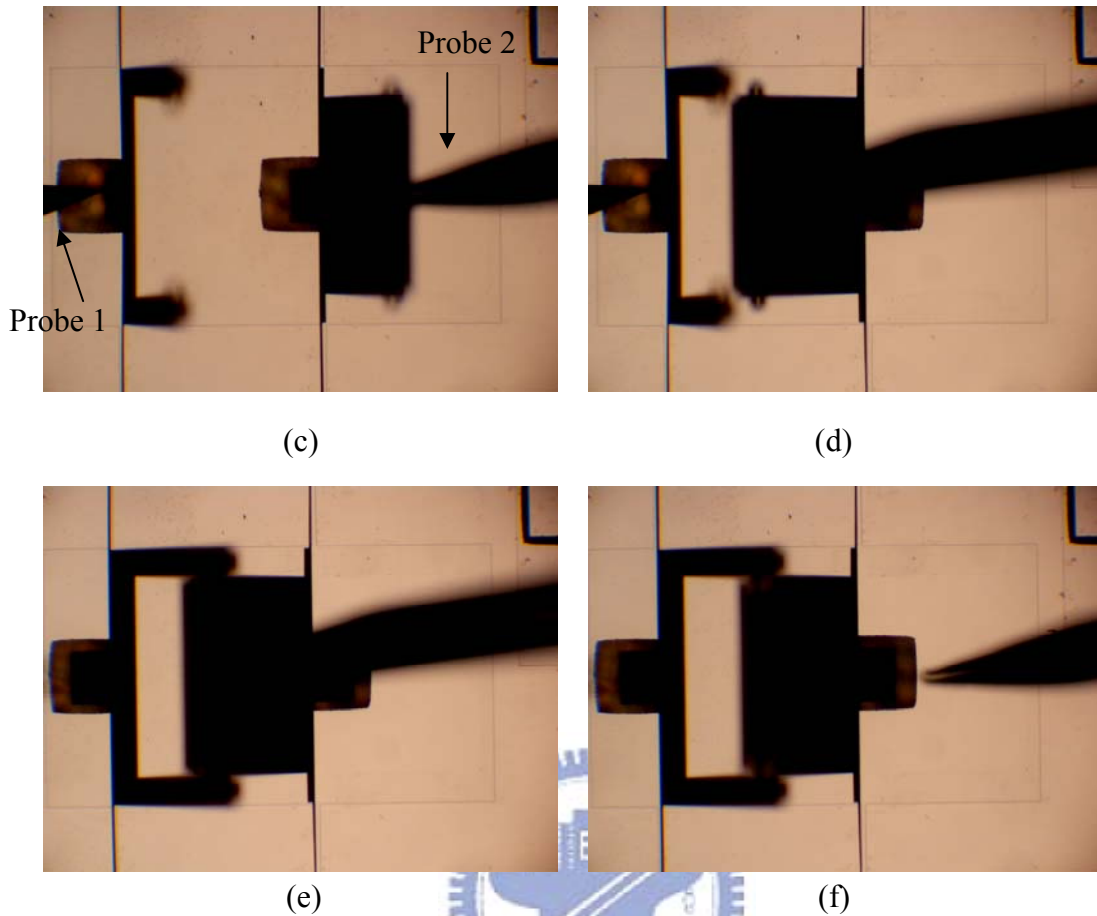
Assembly process of a 135° mirror without hinge (continued), (c) Probe1 removed from the mirror plate and support pushed by Probe 1, (d) mirror plate pushed by Probe 2, (e) Probe 1 remove from support, (f) Probe 2 removed.
